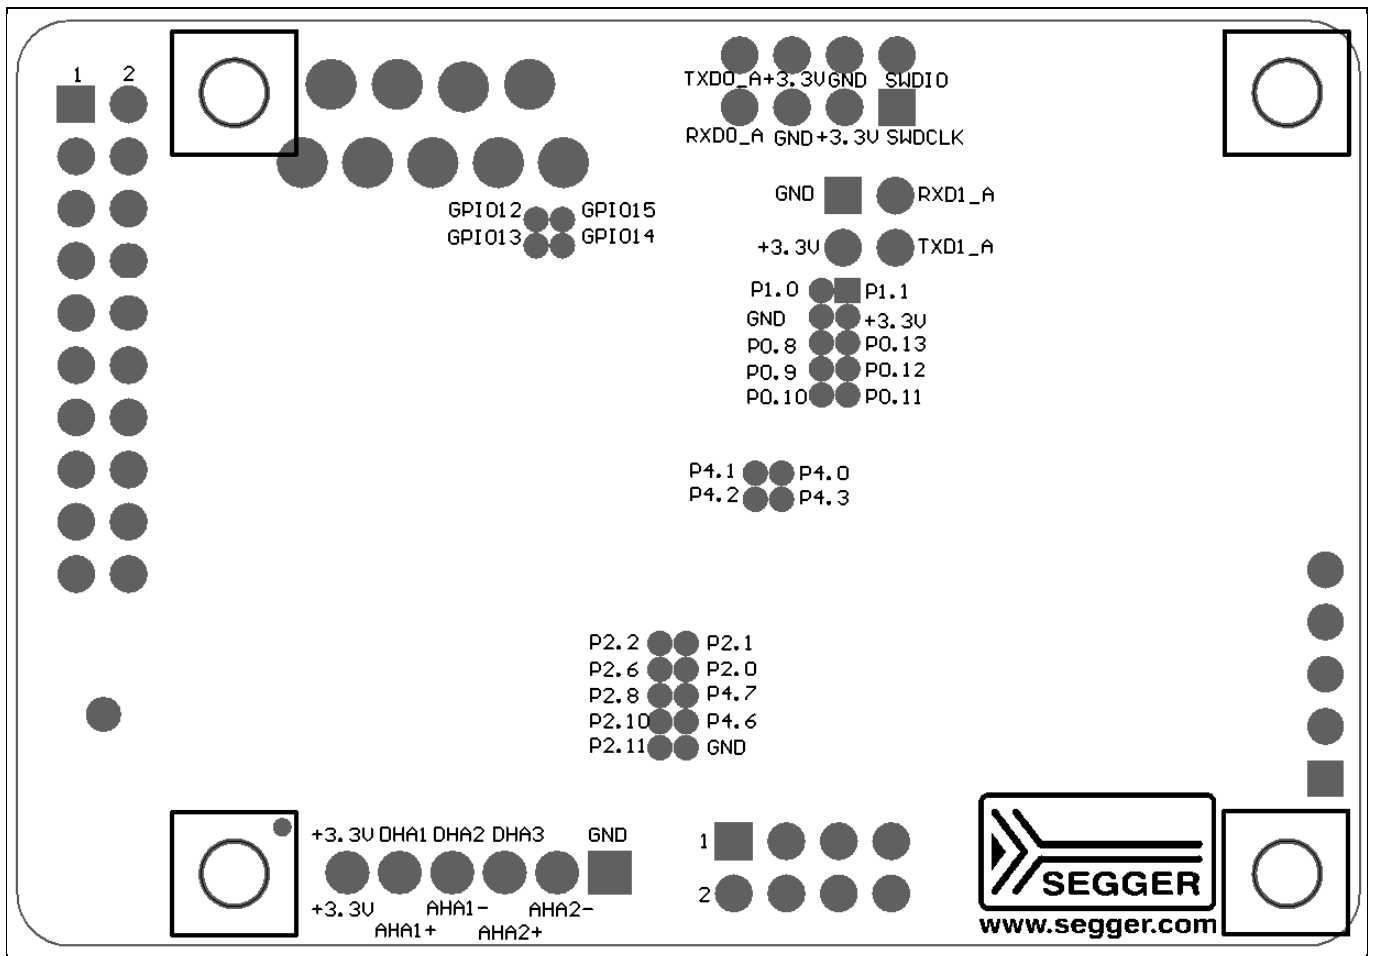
Bottom overlay print of the EVAL-M1-301F evaluation board
